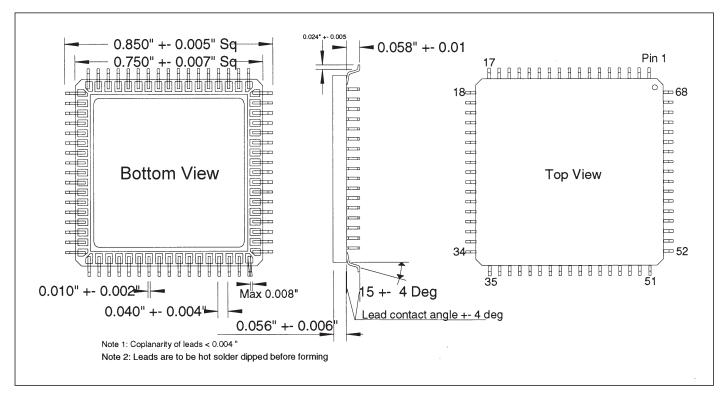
Package 68 pin MLC, Gullwings (68BA). All Dimensions are in inch.
